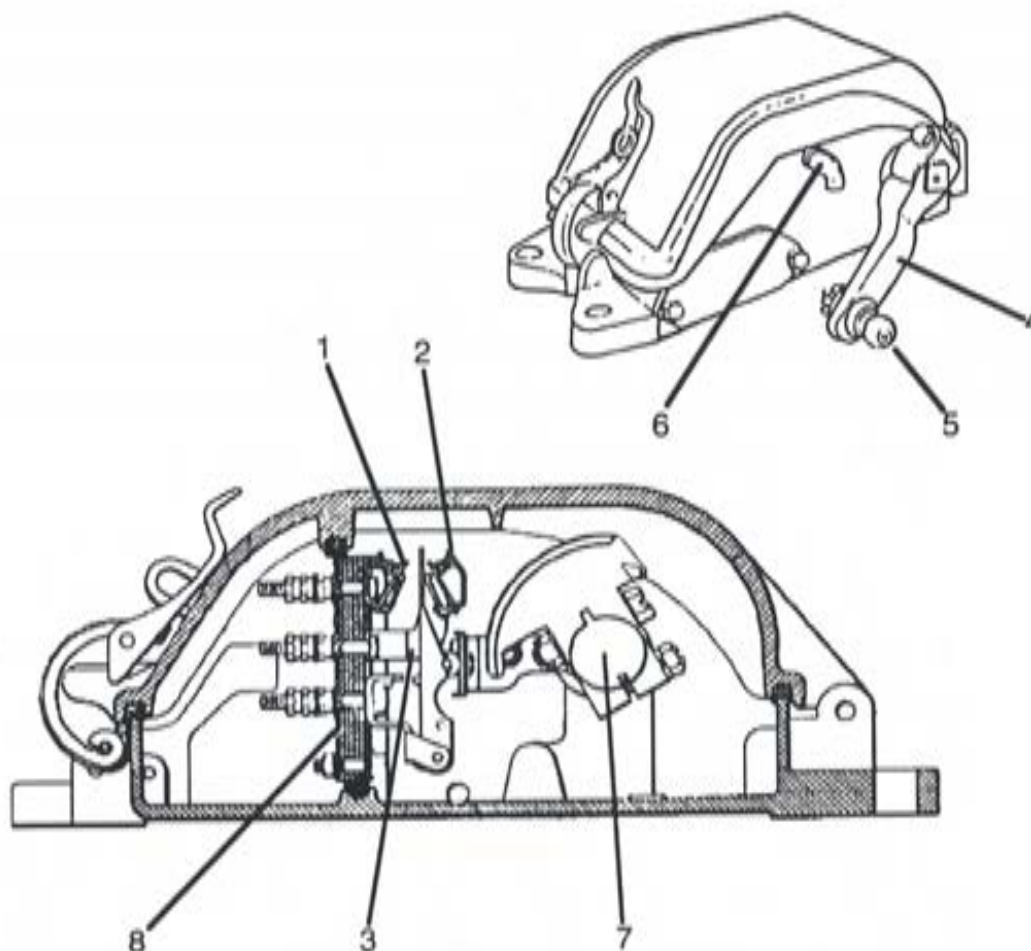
Model 7B Switch Circuit Controller (Sheet 1 of 2)
